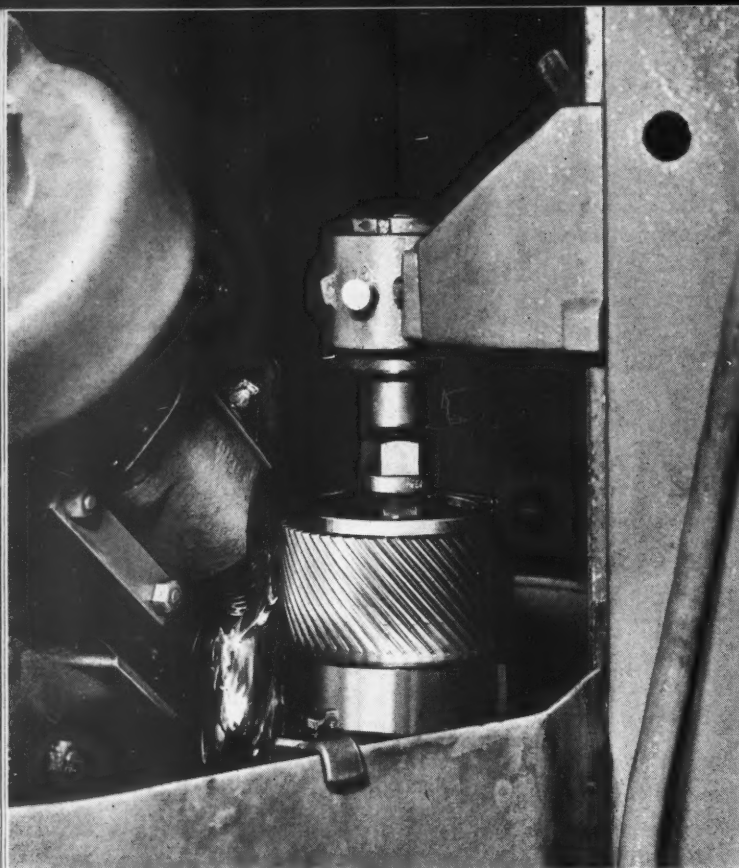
Close-up view of the triple-thread hobbing operation performed on the gear seen at the lower left in Fig. 1. About 0.002 inch of stock is left on each tooth face for removal in a subsequent shaving operation
